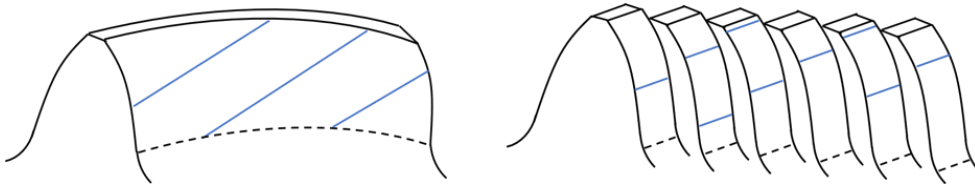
Contact line of helical gear(left) and sliced helical gear(right).
